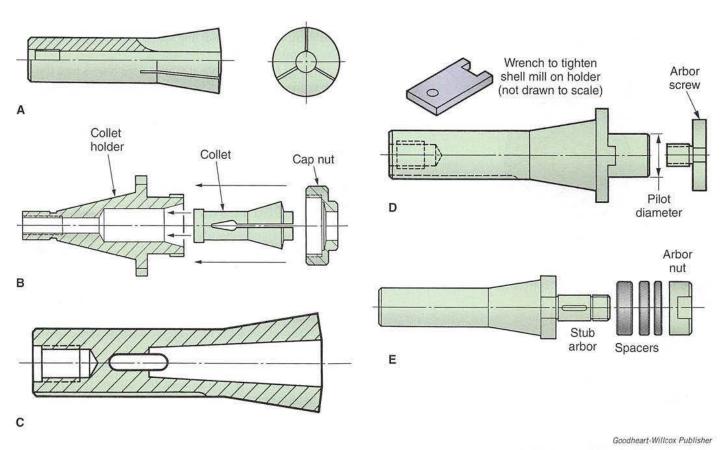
Mounting devices. A—Spring collet (R-8 taper). B—Collet chuck and collet. C—Adapter used with taper shank cutting tools. D—Shell end mill holder (R-8 taper). E—Stub arbor (R-8 taper).
